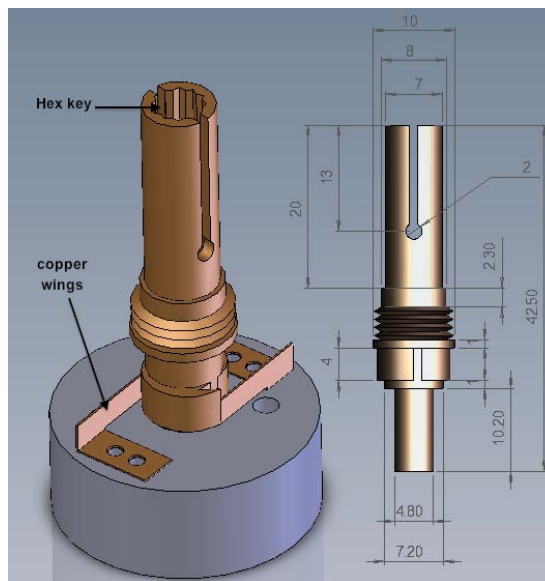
The tip tool has a hex key like structure at one end in order to screw tip holders in and out of the STM. The base has holes of the correct size for the transfer fork. The main copper part, dimension shown in mm, has a sprung section with copper wings which avoids over-tightening the tip holder in the STM. The bottom of the main copper section also has a threaded part for securing the tip tool within the UHV system. The split in the main body is to allow the tool some flexibility over the tip holder, each tip holder may not be exactly 5 mm across, this is also why copper was chosen as the material.
